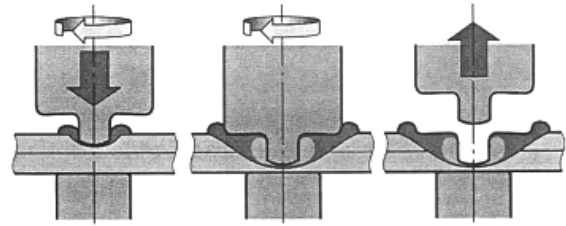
Process of friction stir spot welding<sup>4)</sup>
